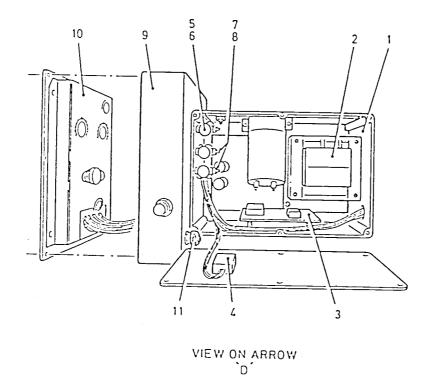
Engine/alternator assembly - view D on Fig. 1
